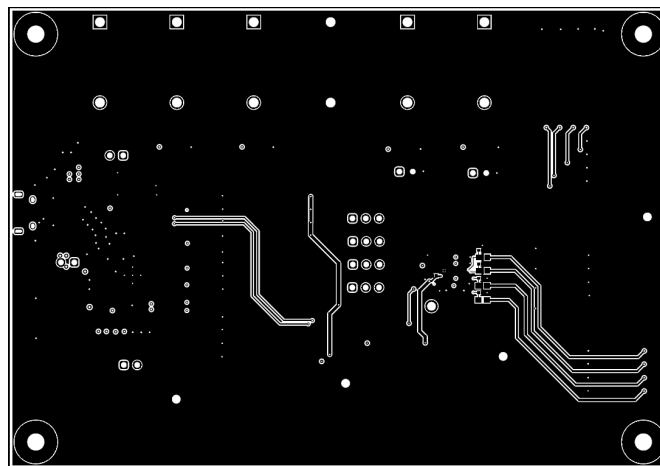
AMC6V704EVM PCB Bottom Layer Layout
